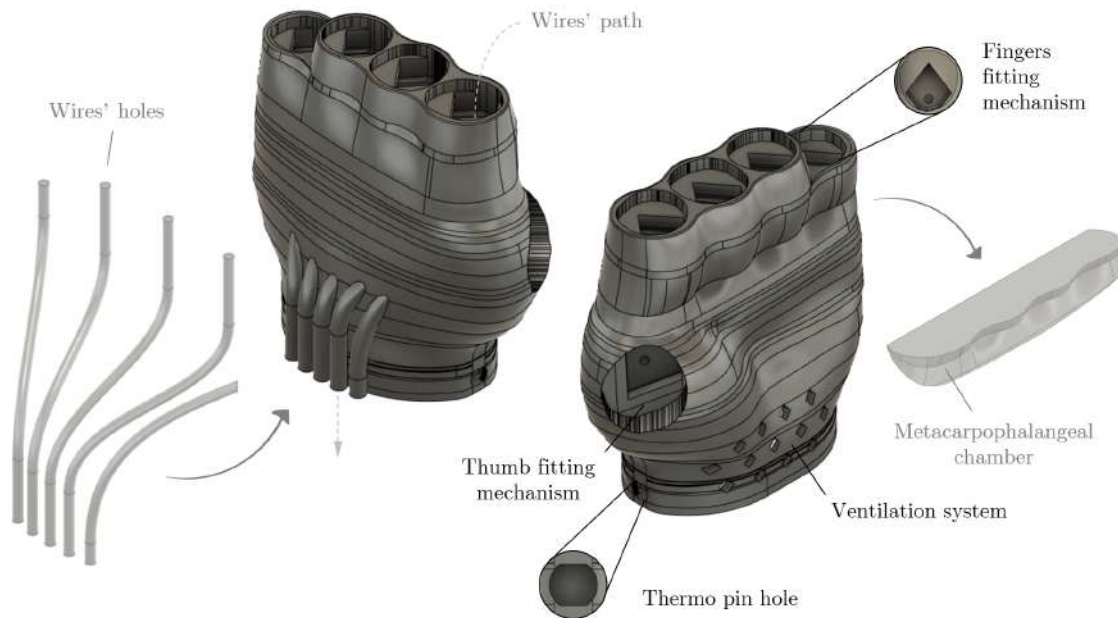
Metacarpal region design: lighter grey structures represent the inner mechanisms, in this case, the positive mould of the metacarpophalangeal chamber and the wire's holes.
